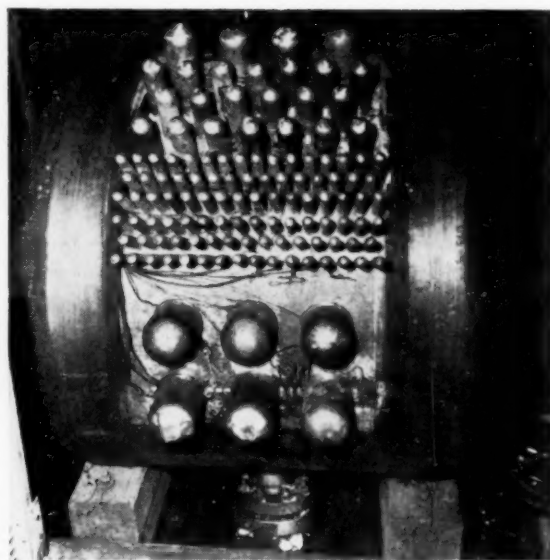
EXTERNAL VIEW OF FULL-SIZE DRUM SPECIMENS SHOWING TEST SETUP ON TUBE LIGAMENTS
